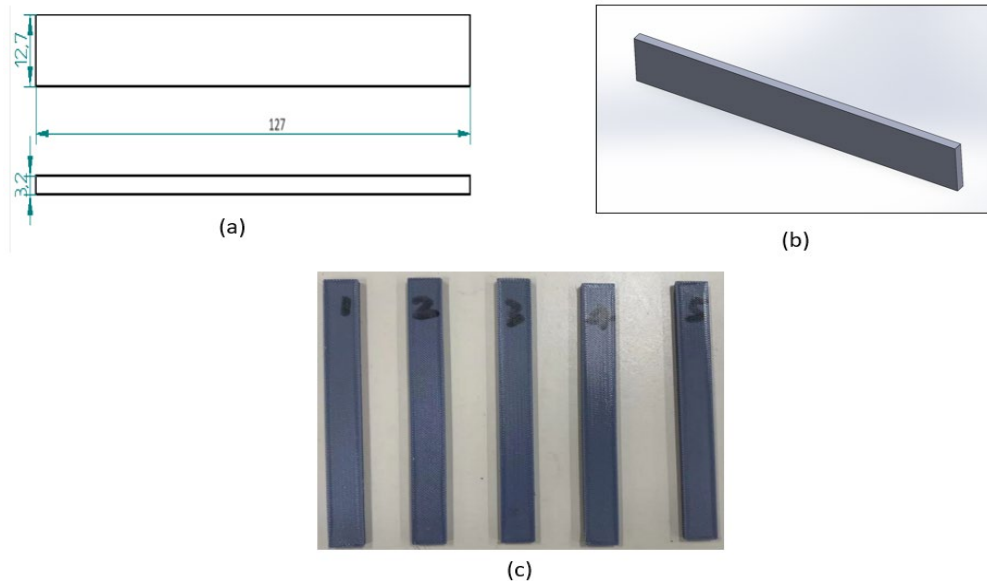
(a) ASTM D790-10 standard flexural specimen dimension, (b) CAD design of the flexural specimen, and (c) Raise 3D FDM printed flexural specimens [110].
